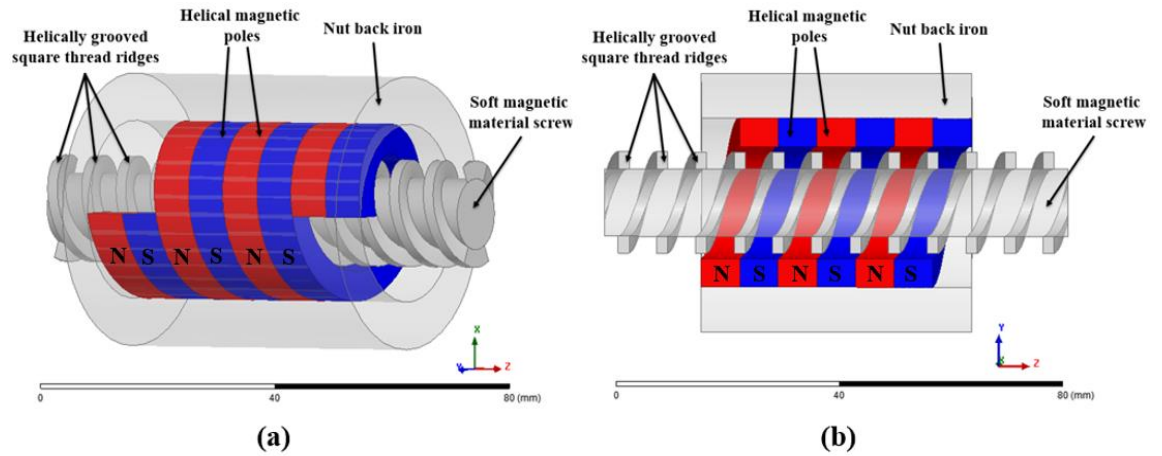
Magnetic screw device: (a) 3D view, (b) Cross-section showing square thread ridges.
